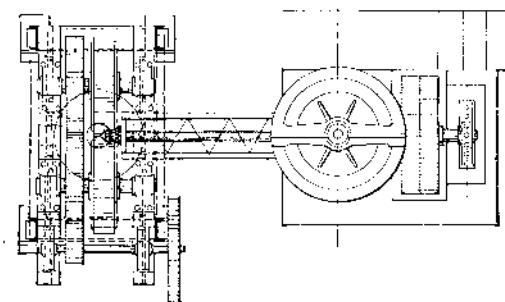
A.—TOP PLAN VIEW OF MACHINE IN FIG. 5.
